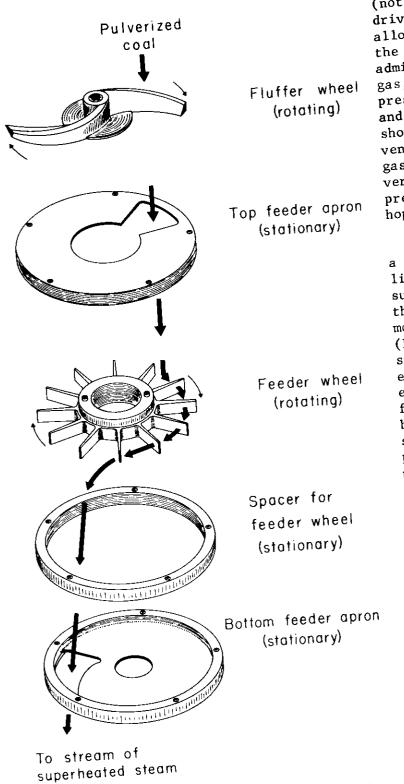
Exploded View of Star-Wheel Feeder.
